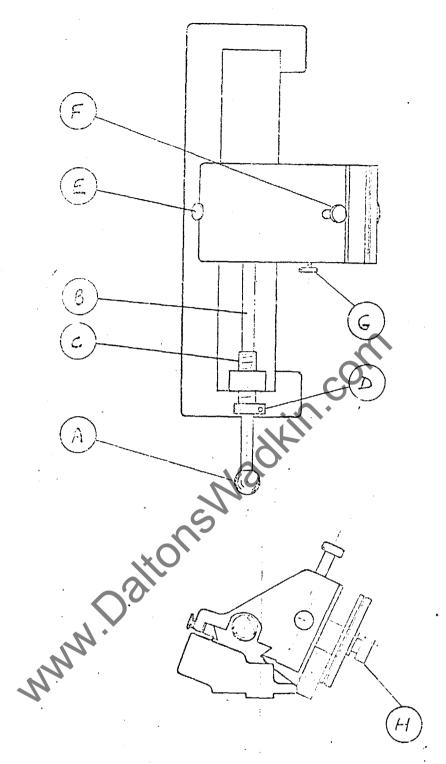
PROFILE JOINTER FOR HORIZONTAL HEADS
